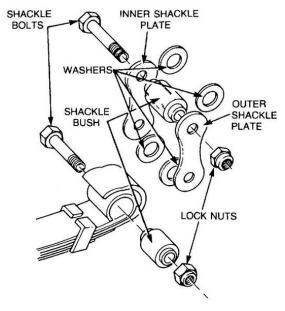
Removal of the Shackle Bolts (Rocker Beam End)
